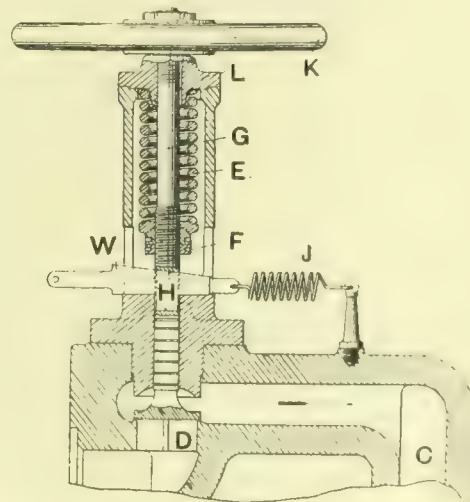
SECTION OF AUTOMATIC CONTROLLING VALVE FOR STEAM ENGINES.
